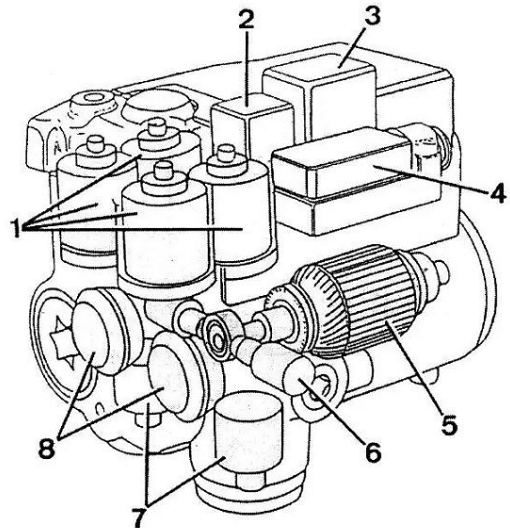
Electro-hydraulic modulator: 1 – solenoid valves, 2 – hydraulic pump relays, 3 – solenoid valve relays, 4 – electrical connector, 5 – electric pump motor, 6 – pump piston element, 7 – pressure accumulator, 8 – silencer
